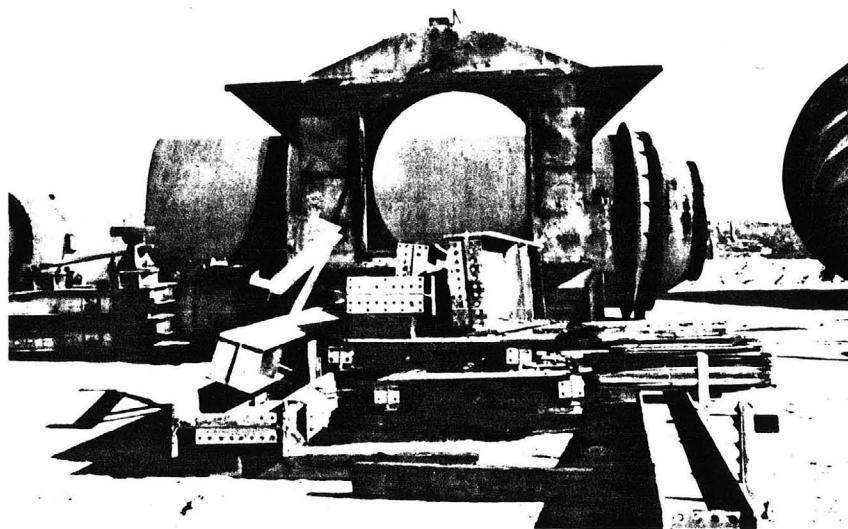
Two center sections of the Rotary Reduction Kiln.
